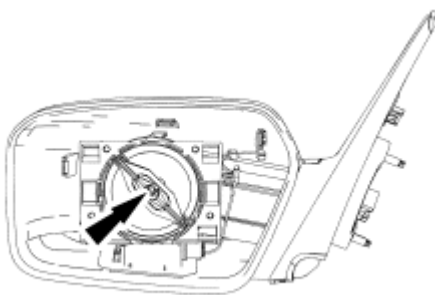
Locating Screw From Center Of Exterior Rear View Mirror Motor
